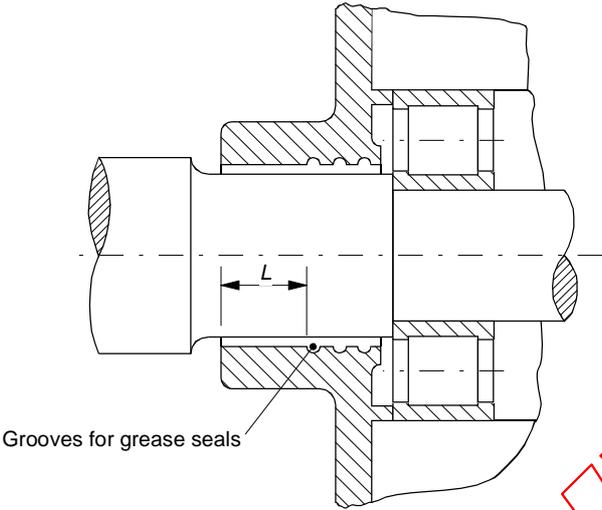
Example of cylindrical joint for shaft of rotating electrical machine
